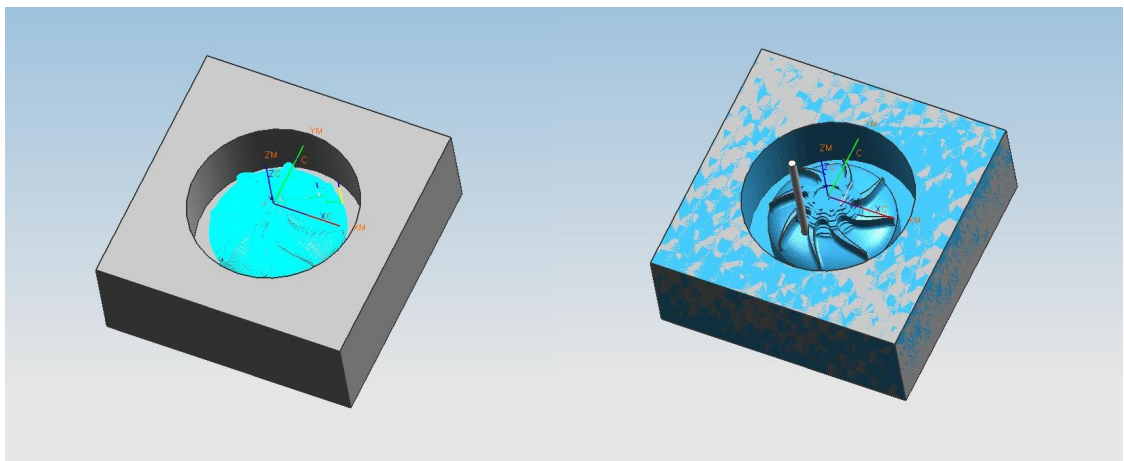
Tool path and 3D simulation of the machining process for the impeller Model 2 in the semi-finish milling process with a 3 mm ball-end mill
